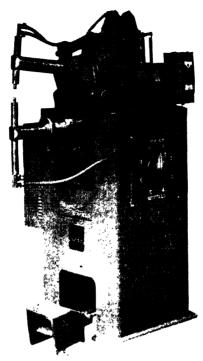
An automatic timing device for a Resistance welder. Note the motor and control in upper right corner
